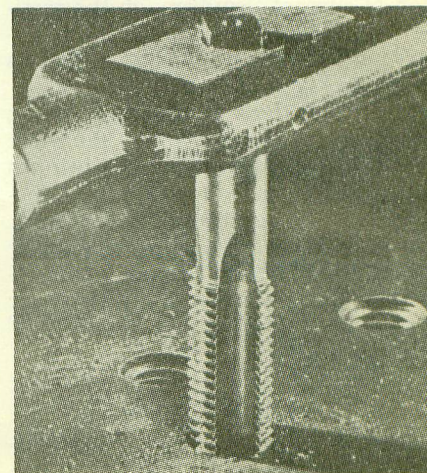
Special drill taps are provided in thread repair kit for threading drilled hole to correct size for outside of thread insert. A standard tap cannot be used.
